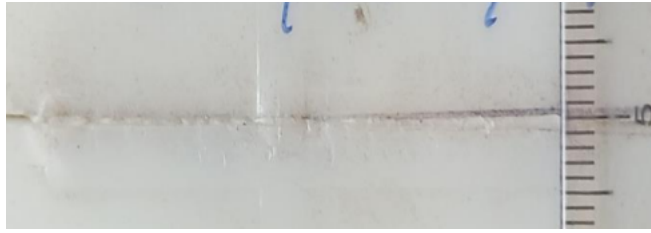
6: Spindle Speed at 360 rpm (Back View)
